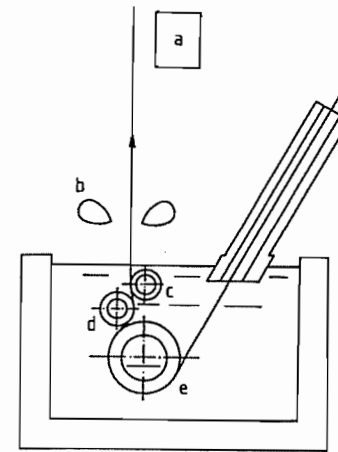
Control of coating thickness: a) Coating thickness measurement; b) Jet processing nozzle (slit); c) Pass line roll; d) Stabilizing roll; e) Bottom roll.
